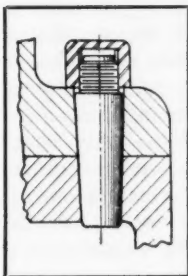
Drawing showing design of taper pin having threaded end with smaller diameter than body. Cap nut provides means for pin removal and serves to protect threads.
